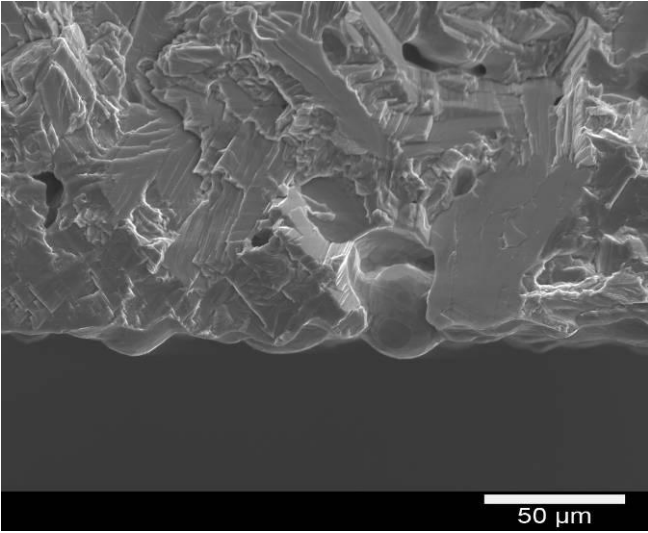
Typical fracture surface of MIM35L samples.
